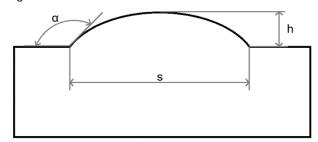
Cross-sectional view of a single weld bead with measured width (s [mm]), height (h [mm]), and deposition bead angle (α [°]).
